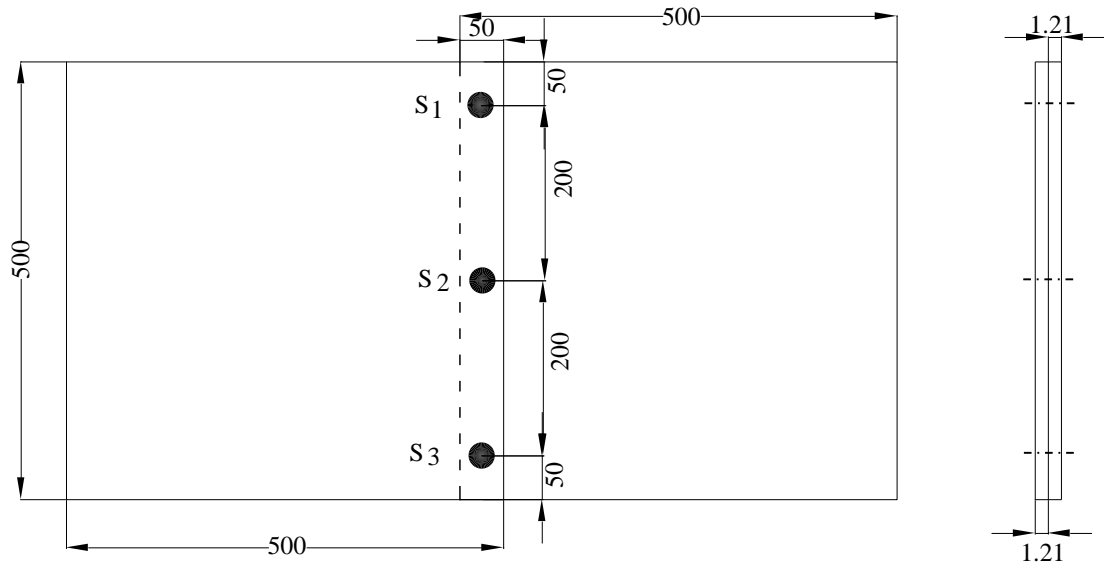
Geometric dimensions of plates with spot- welds (Case-1)
